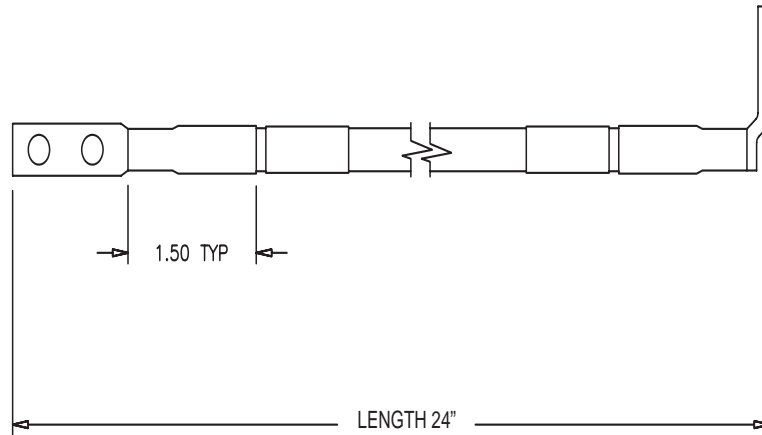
SXi Serial IF Cable P/N 830-0906-01
